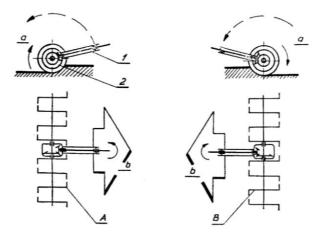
Re-assembling the soil miller to obtain reversed direction rotation of working drum.
